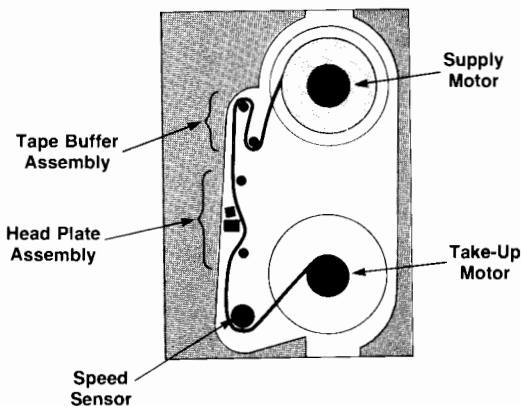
Main casting assembly and location of tape-path components for the HP 7978A.
